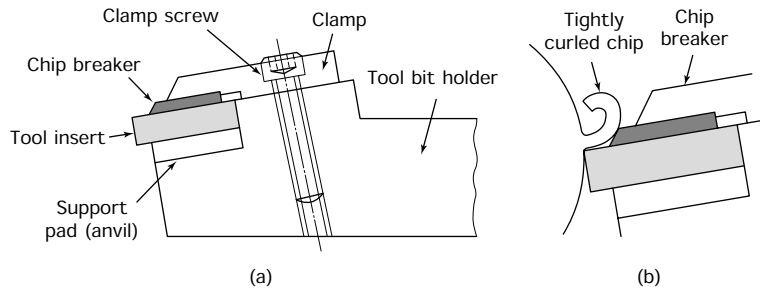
Chip breaker: (a) inserted tip tool with chip breaker; (b) action of chip breaker
